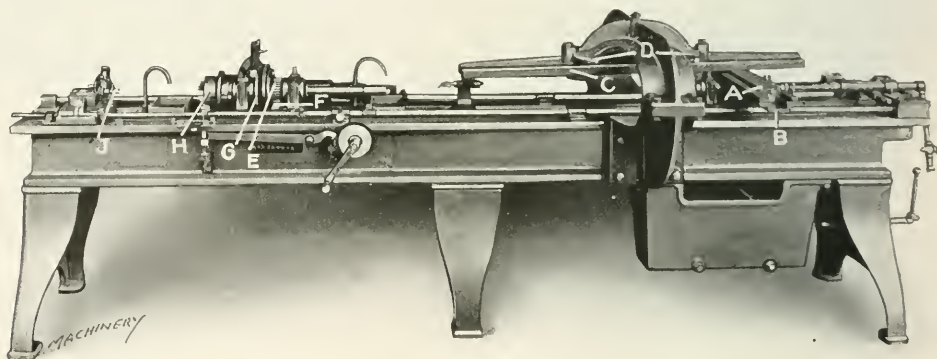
Rifling Machine built by the Diamond Machine Co.
